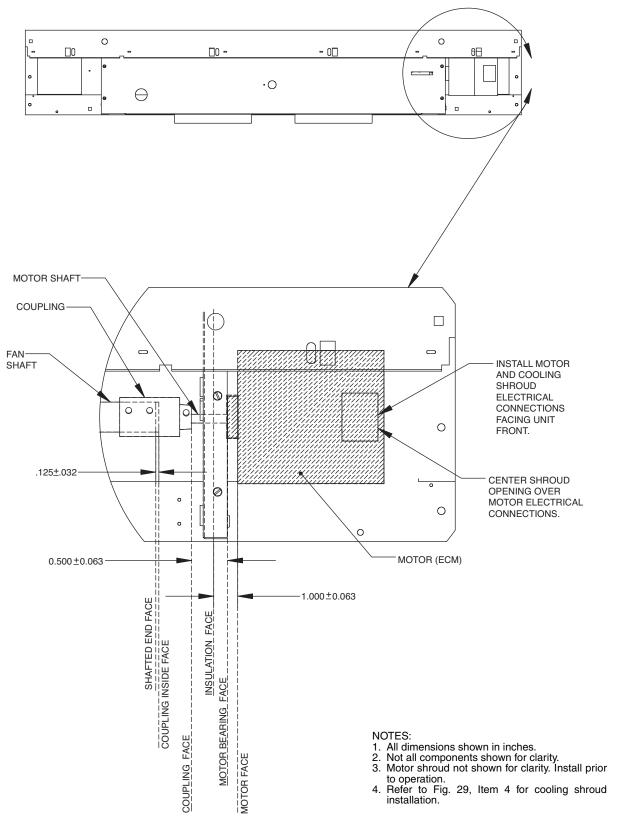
40UV,UH Ventilator Blower Section Assembly — ECM Motor Detail
